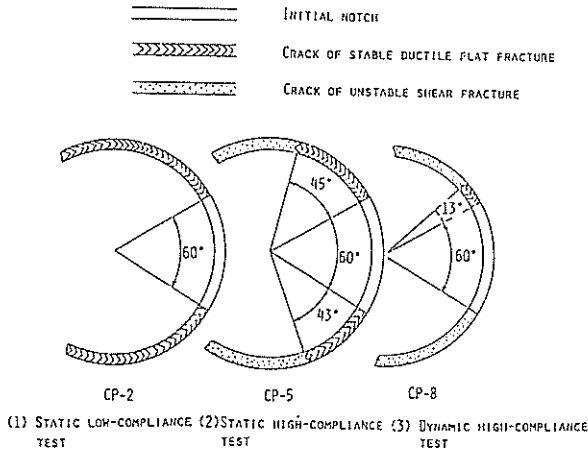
Cross-sectional View of Post-fracture Surface
